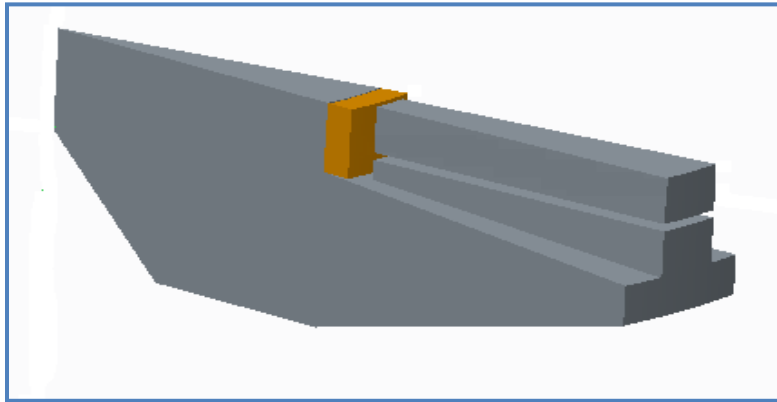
Single Tooth, Half Geometry of Coil at IR
